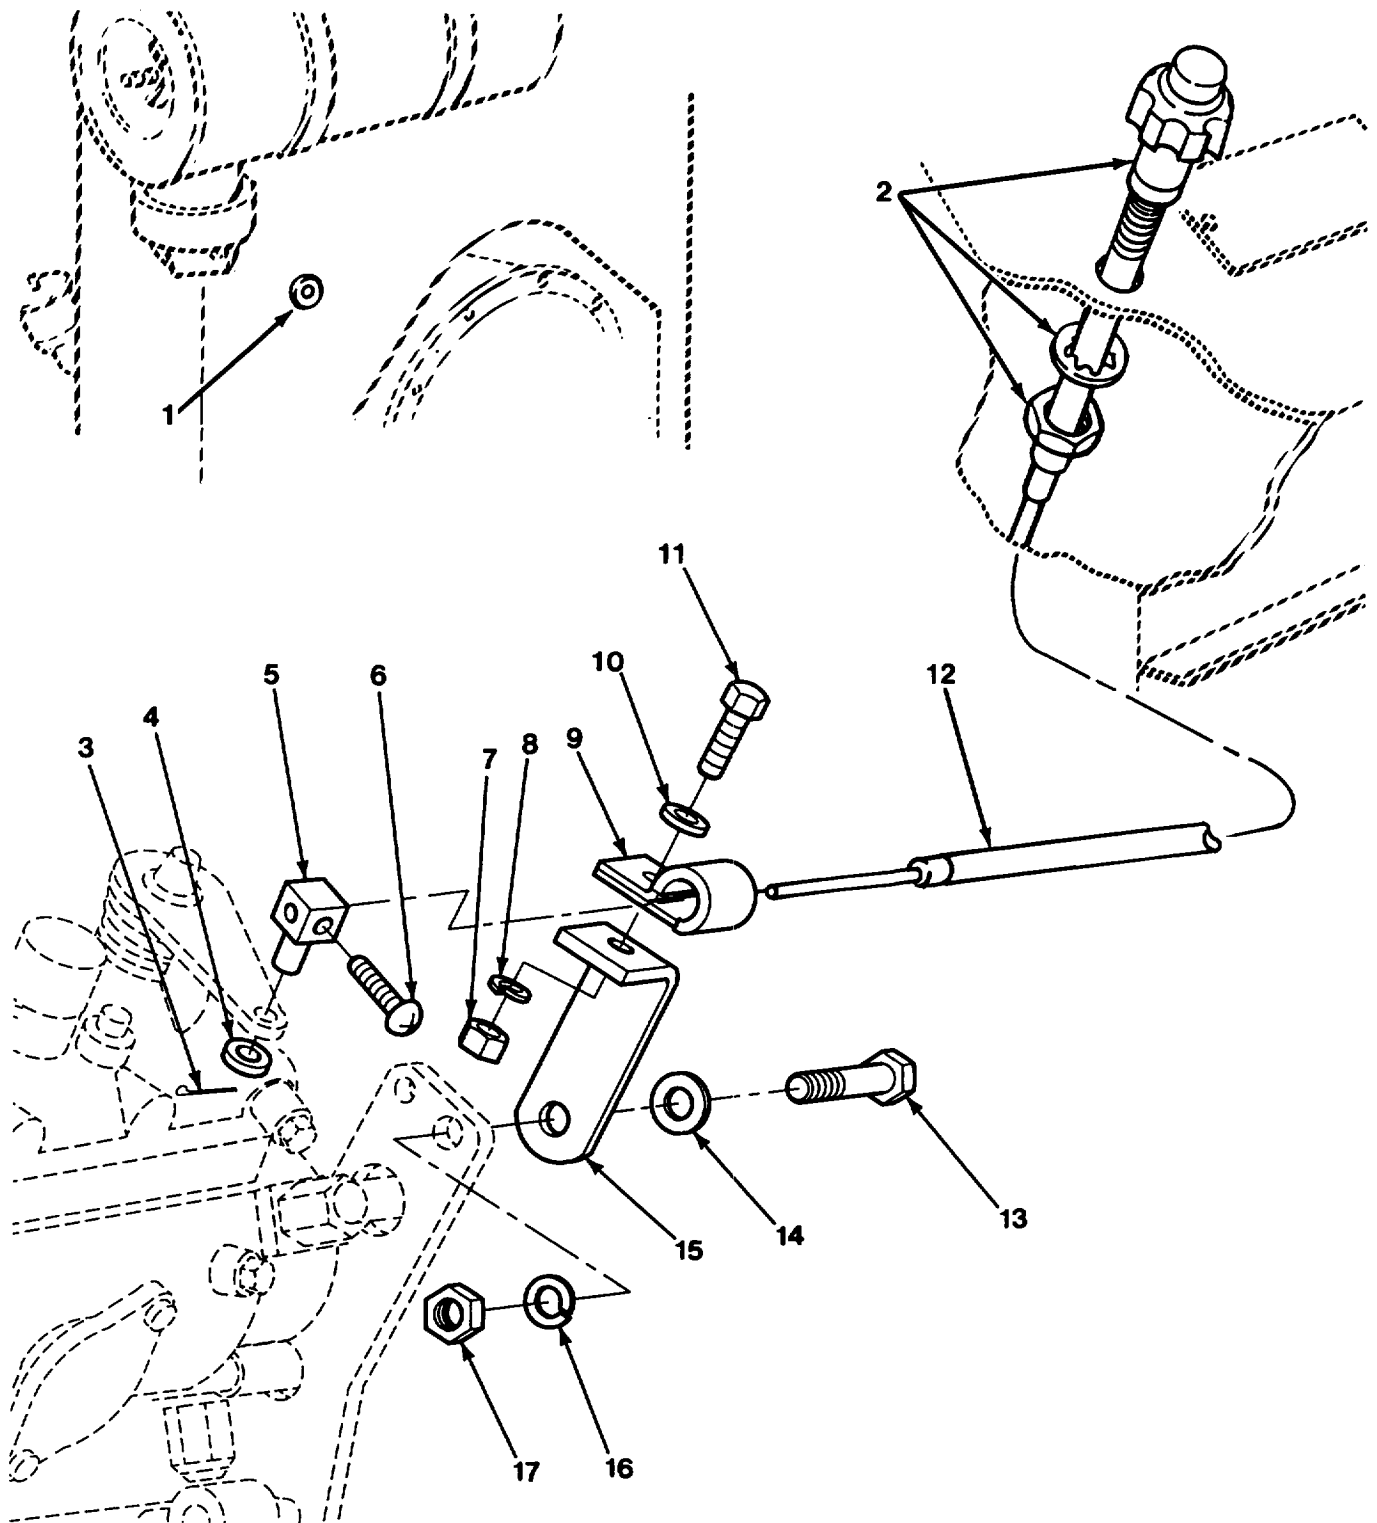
ENGINE THROTTLE AND THROTTLE CONTROL CABLE
